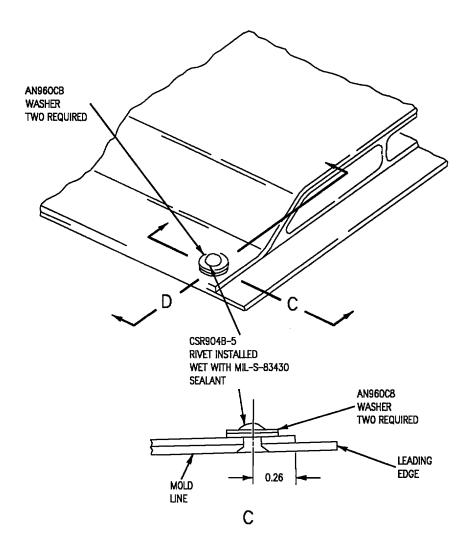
Main Landing Gear Outboard Door Leading Edge Inboard Corner Repair (Sheet 1)
